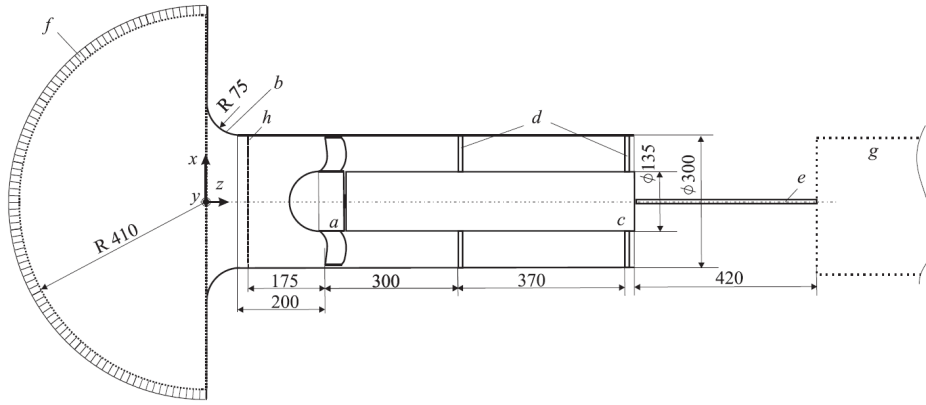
Schematic view of the ducted USI7 fan assembly a) USI7 impeller with its hemispherical hub nose b) inlet bellmouth c) bearing and electric drive d) support struts (M8 threaded rods) e) optional external drive shaft f) hemispherical flow conditioner g) optional electric motor with integrated torque meter. Dimensions in mm. [Carolus *et al.*, 2015]
